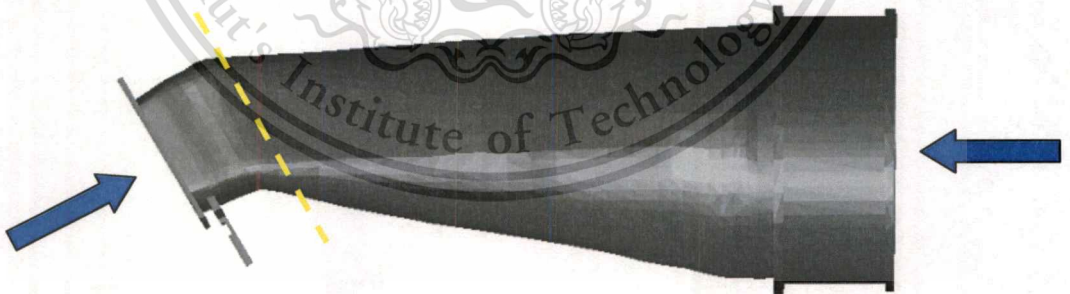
Dividing the coating part into two parts at the bending part of the piece
